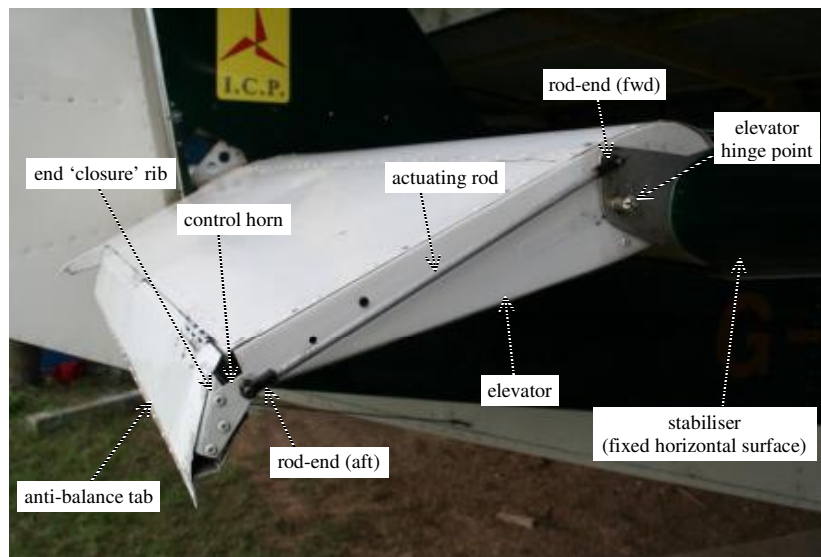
View of starboard end of starboard elevator with fairing removed to show the anti-balance tab control mechanism. This aircraft has manual, 'bungee', pitch trim fitted. The control horn is riveted to the end 'closure' rib. The end 'closure' rib is riveted into the end of the anti-balance tab (upper and lower surfaces).
